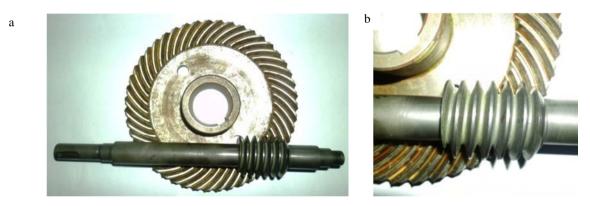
Worm face gear with modified geometry; a) Overview; b) Detail.
